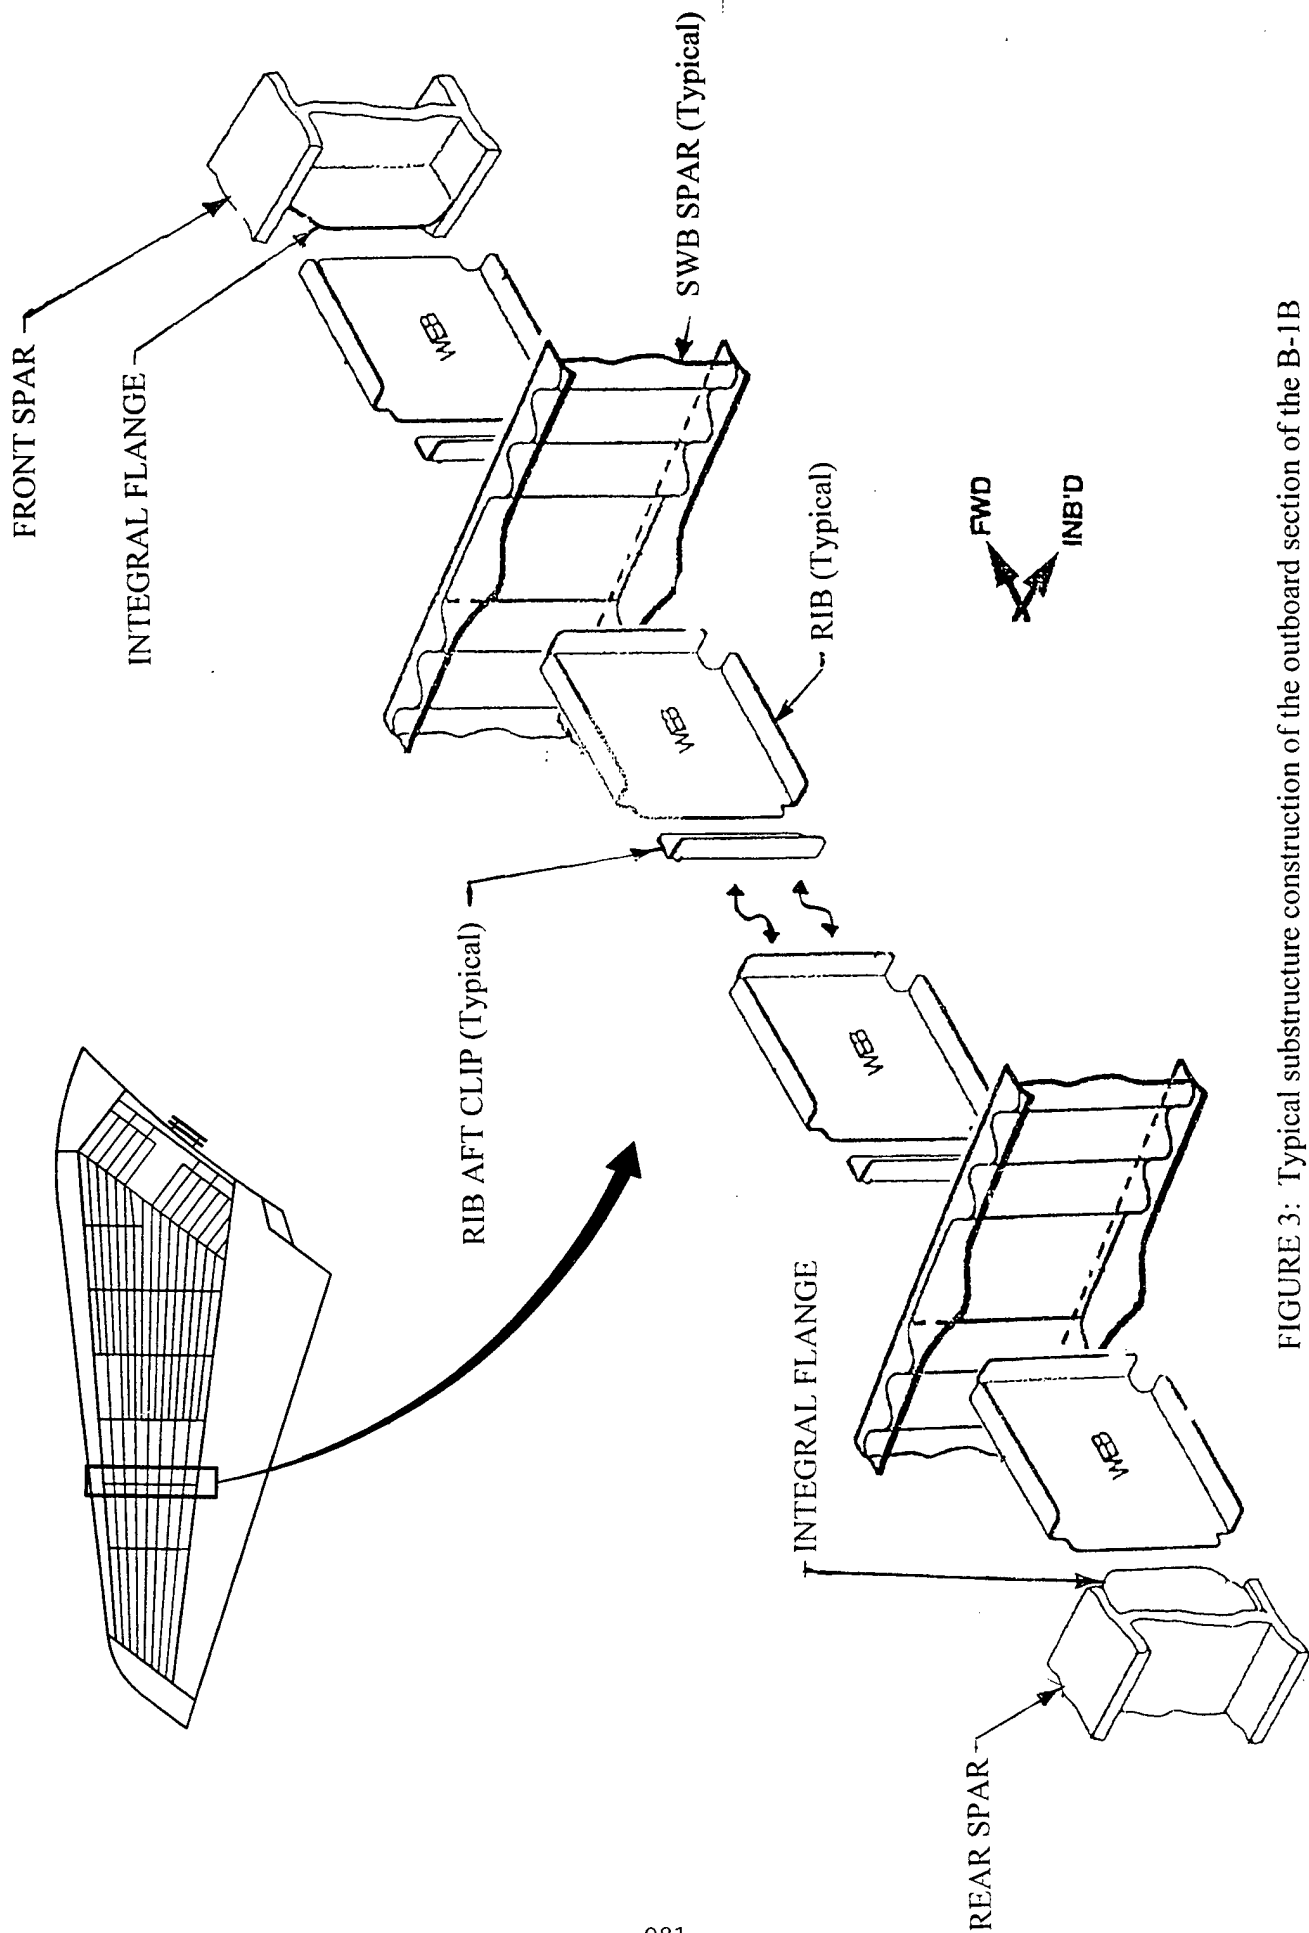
Typical substructure construction of the B-1B Horizontal Stabilizer.
